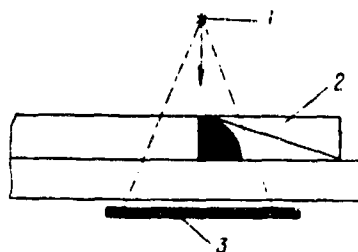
Diagram Showing the X-Ray Processing of Fillet Welds (of Welded Seams in the Ship Sheathing): 1 - vial containing the radioactive substance; 2 - balancing wedge; and 3 - cassette (film holder).
